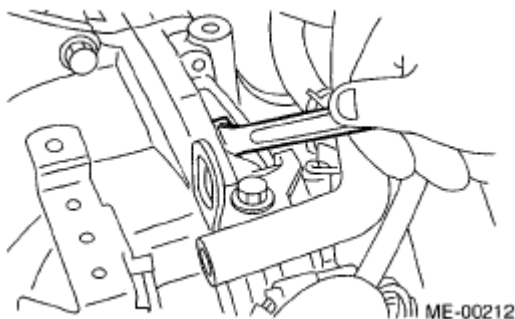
Tightening Bolts Which Hold Torque Converter Clutch To Drive Plate
